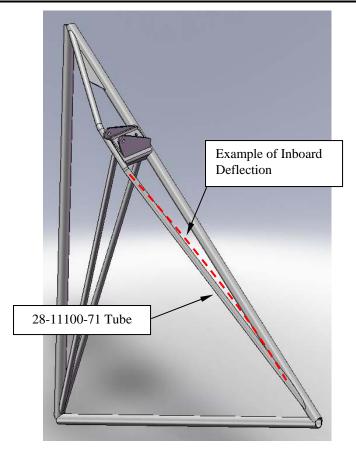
This is a drawing model of a partial pylon assembly and P/N 28-11100-71 pylon tube (view looking down). The dashed line along the tube represents the direction of potential tube deflection.
